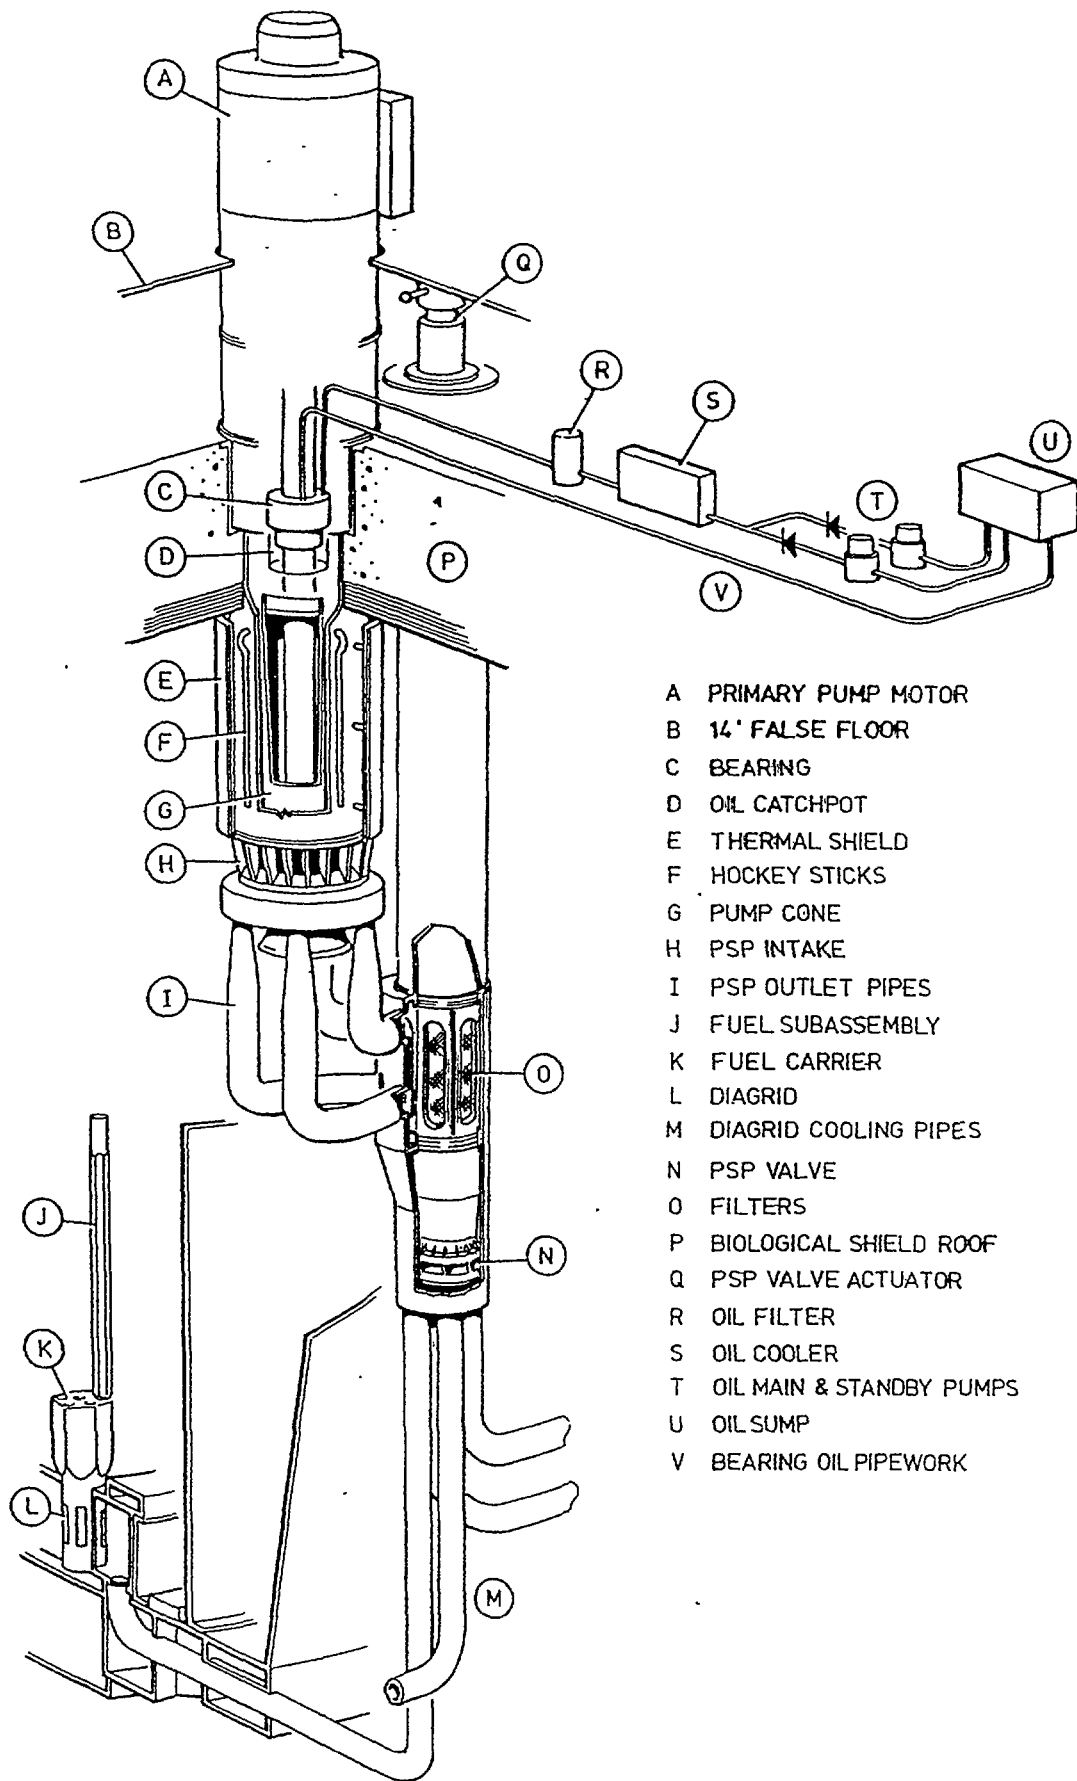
A PFR Primary Sodium Pump and its associated Valve and Filter Assembly
